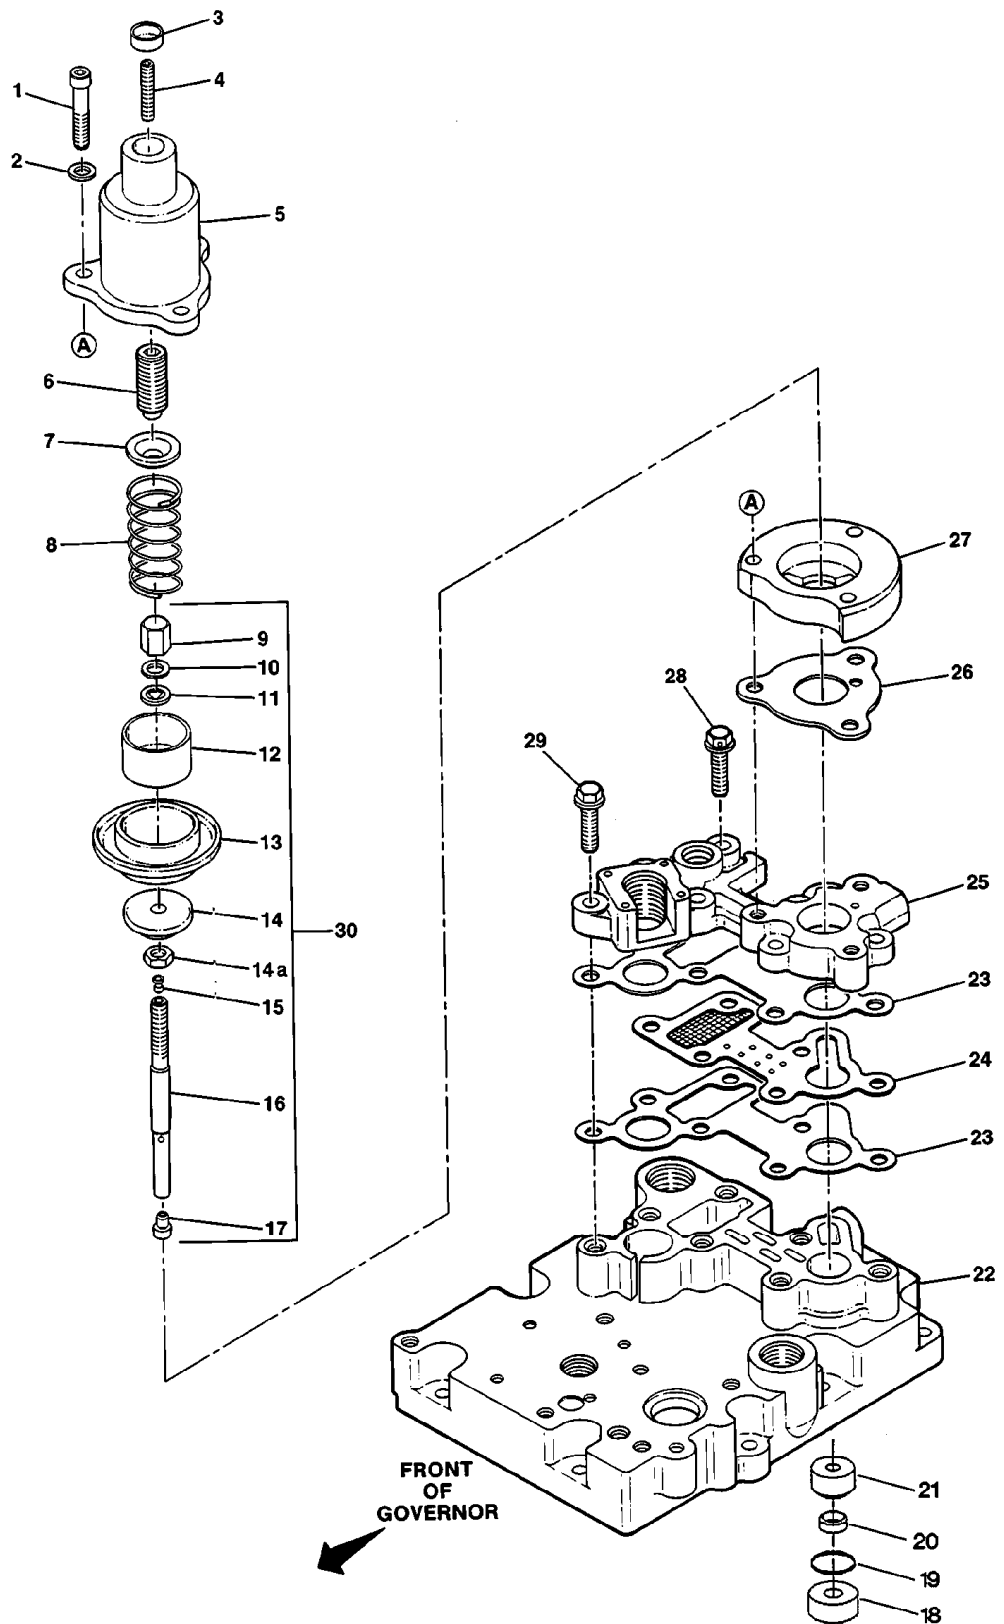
Exploded View of 3161 Solid Piston Air Pressure Fuel Limiter
